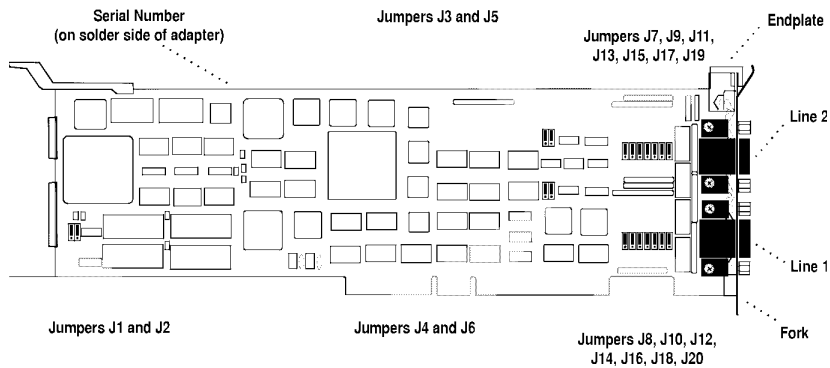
Jumper Locations for Micro Channel Bus Adapter
